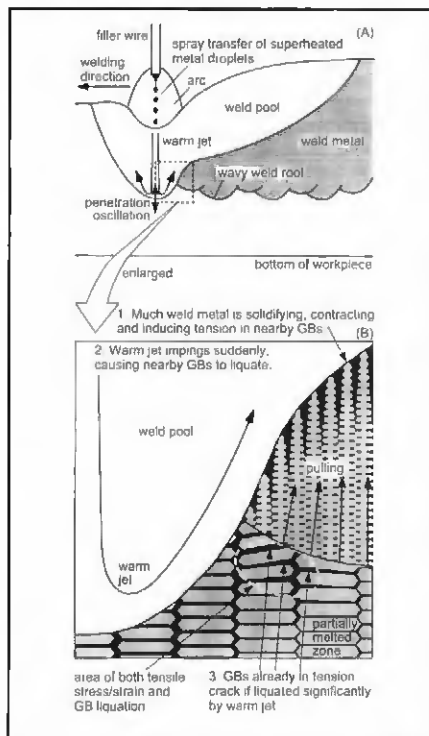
Mechanism of liquation cracking near weld root induced by penetration oscillation and grain-boundary liquation. A — Overview; B — enlarged view (with cracks backfilled).
